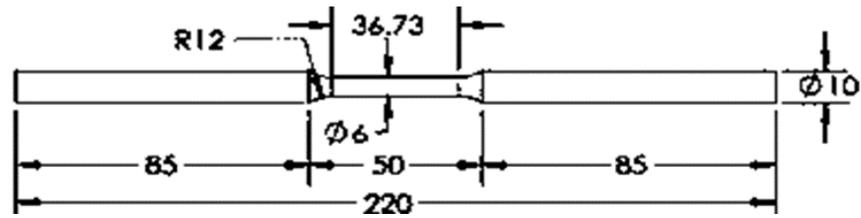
Tensile test specimen shape and size (ASTM E8)
